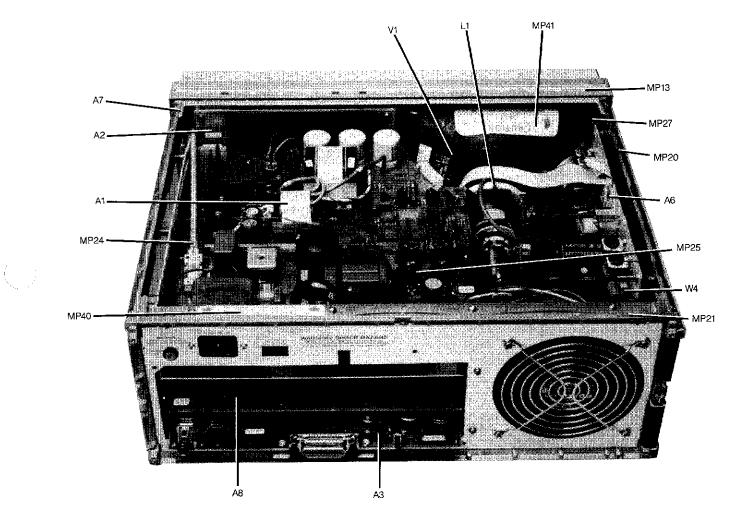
Mainframe Parts Location (Sheet 2 of 3)
